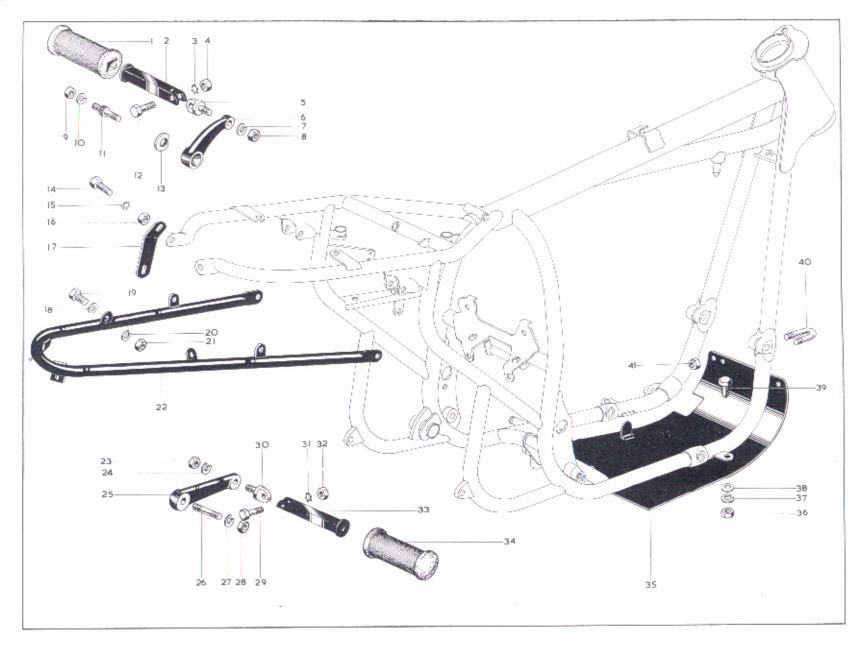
FOLDING FOOTRESTS, REPOSE-PIED RABATTABLE, KLAPP-FUSSRASTE, APOYO PLEGADIZA PARA ELPIE
